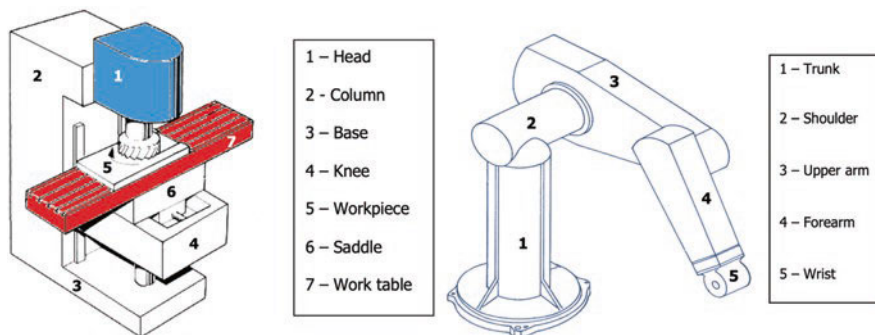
Typical milling machine (left) and serial kinematics robot (right)
